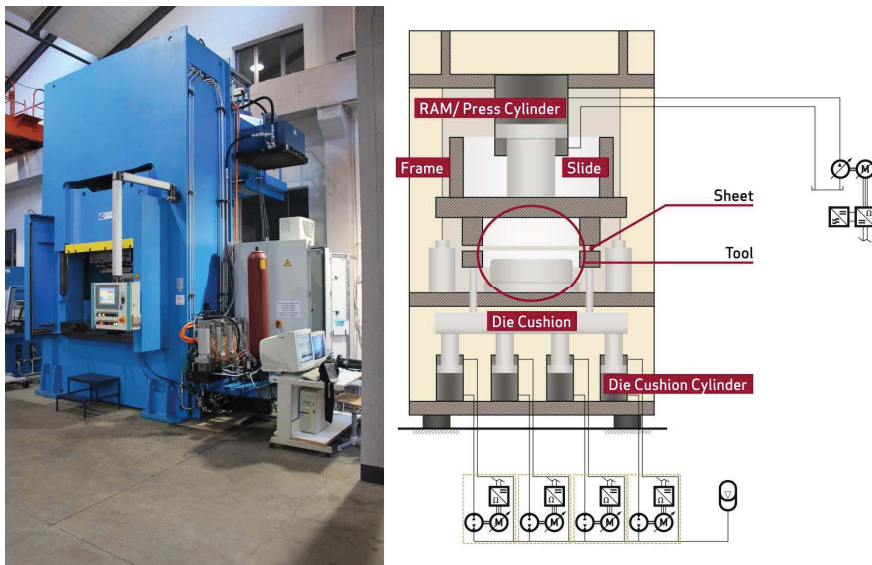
Deep drawing press layout using EHA for die cushion /2/
